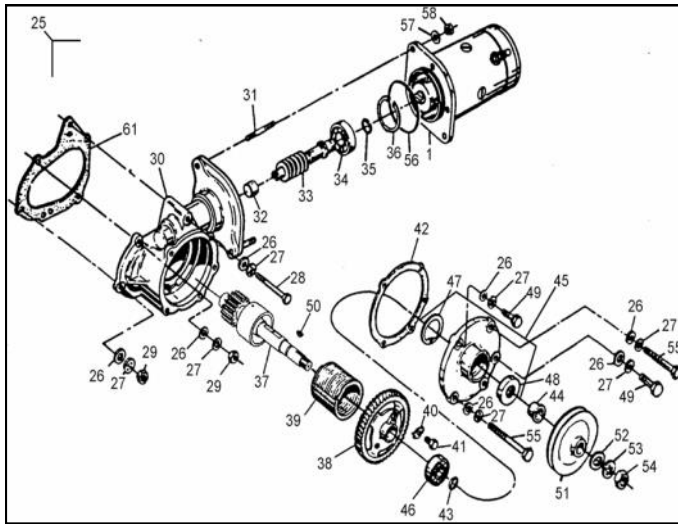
Blown-up drawing of the Continental 90-Degree Starter Drive Adapter.
